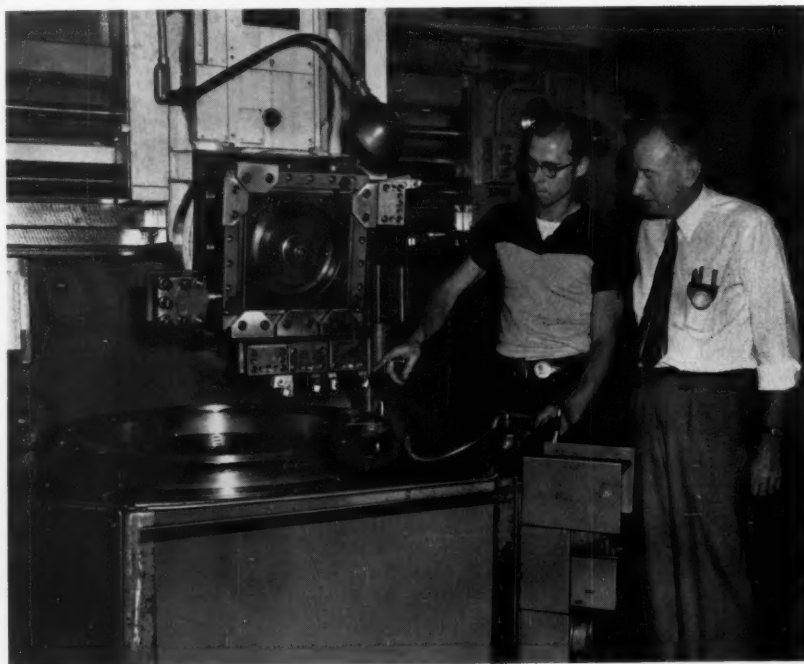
Eighty holes are drilled around the flange of a jet-engine component by this special machine which is equipped with four drilling heads that are used simultaneously.
